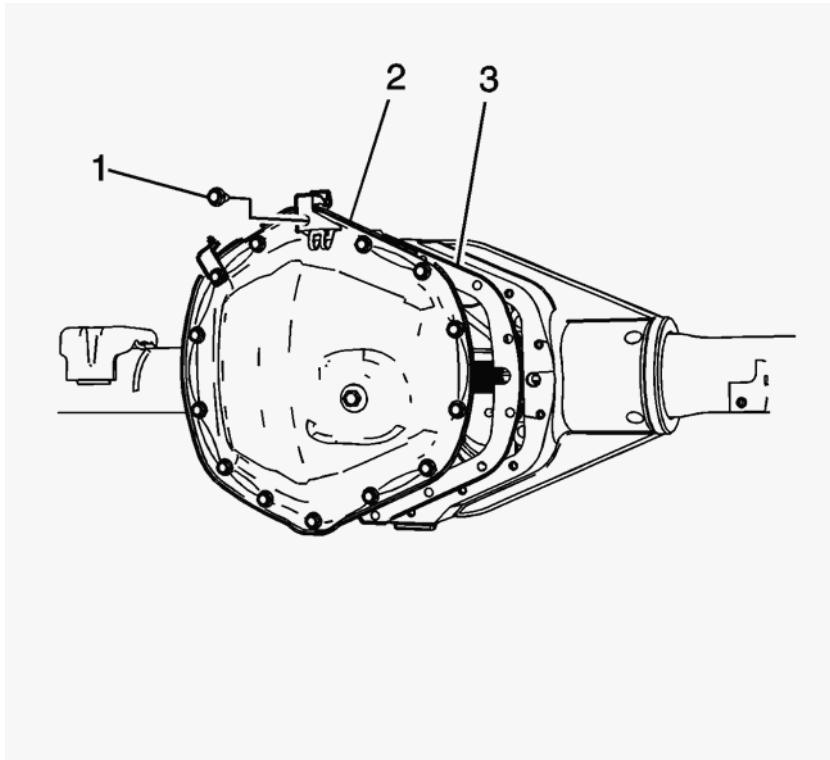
Rear Axle Cover Bolts, Cover And Gasket
